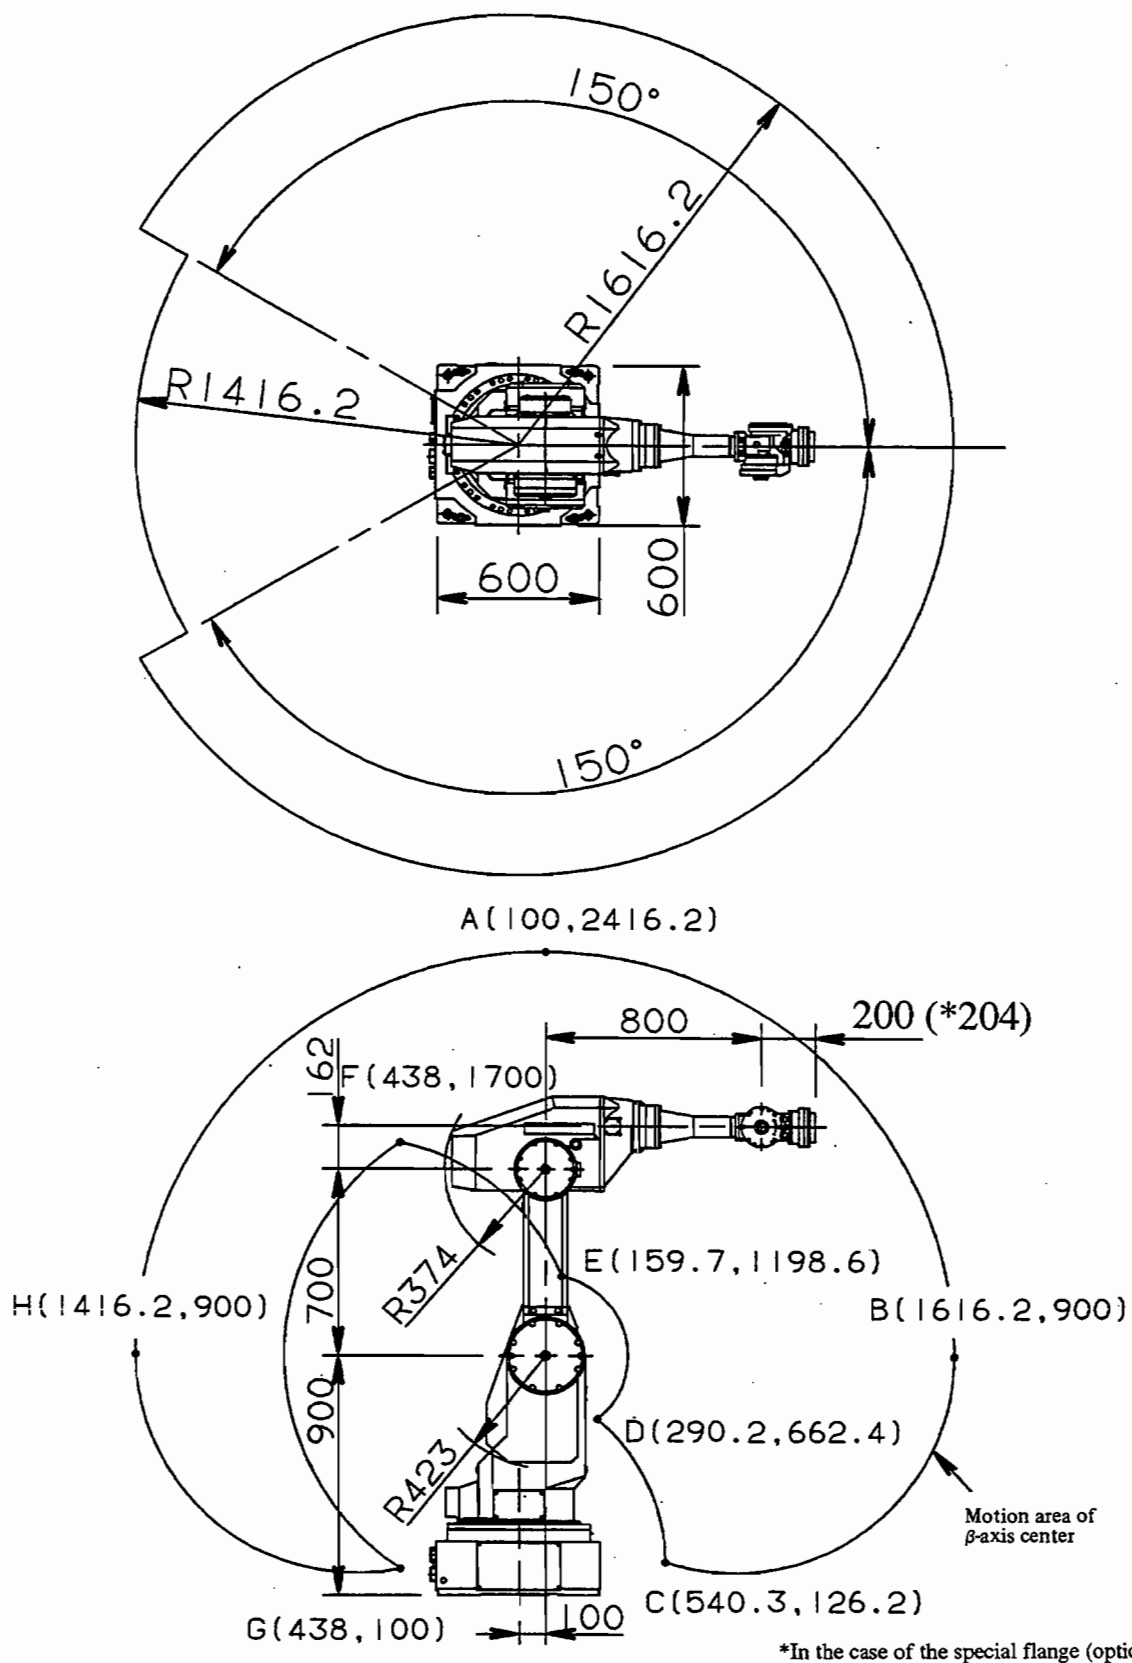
(b) External dimensions of mechanical unit (S-700, in-line wrist)
